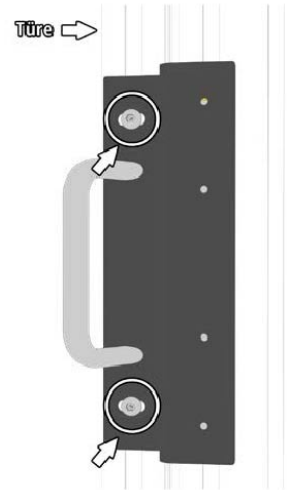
Attach the mounting plate with the anchor plate to the profile and align with the process guard locking. Tighten the Torx screws M8 x 12 mm.
